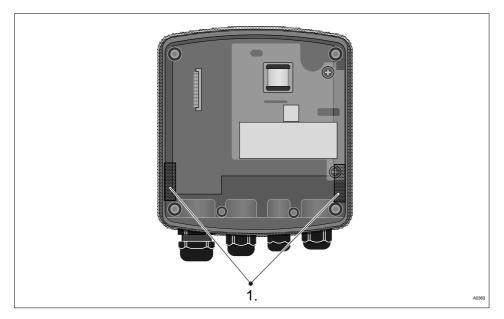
Fitting the profile seal on the bottom section of the controller housing
